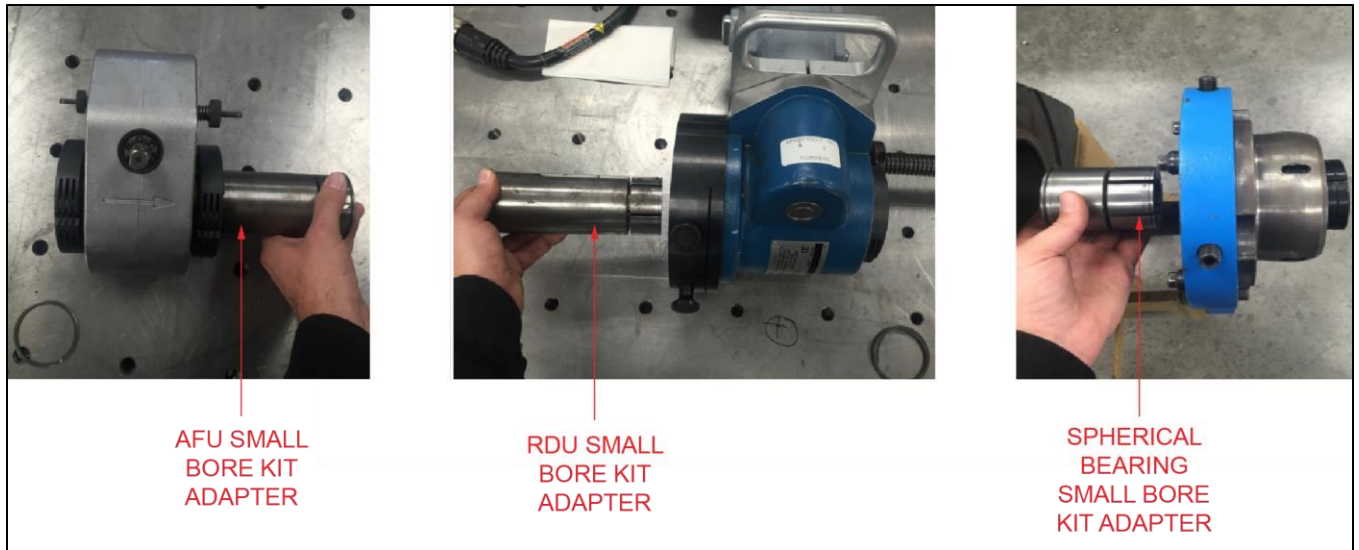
SMALL BORE KIT ADAPTER INSERTED
